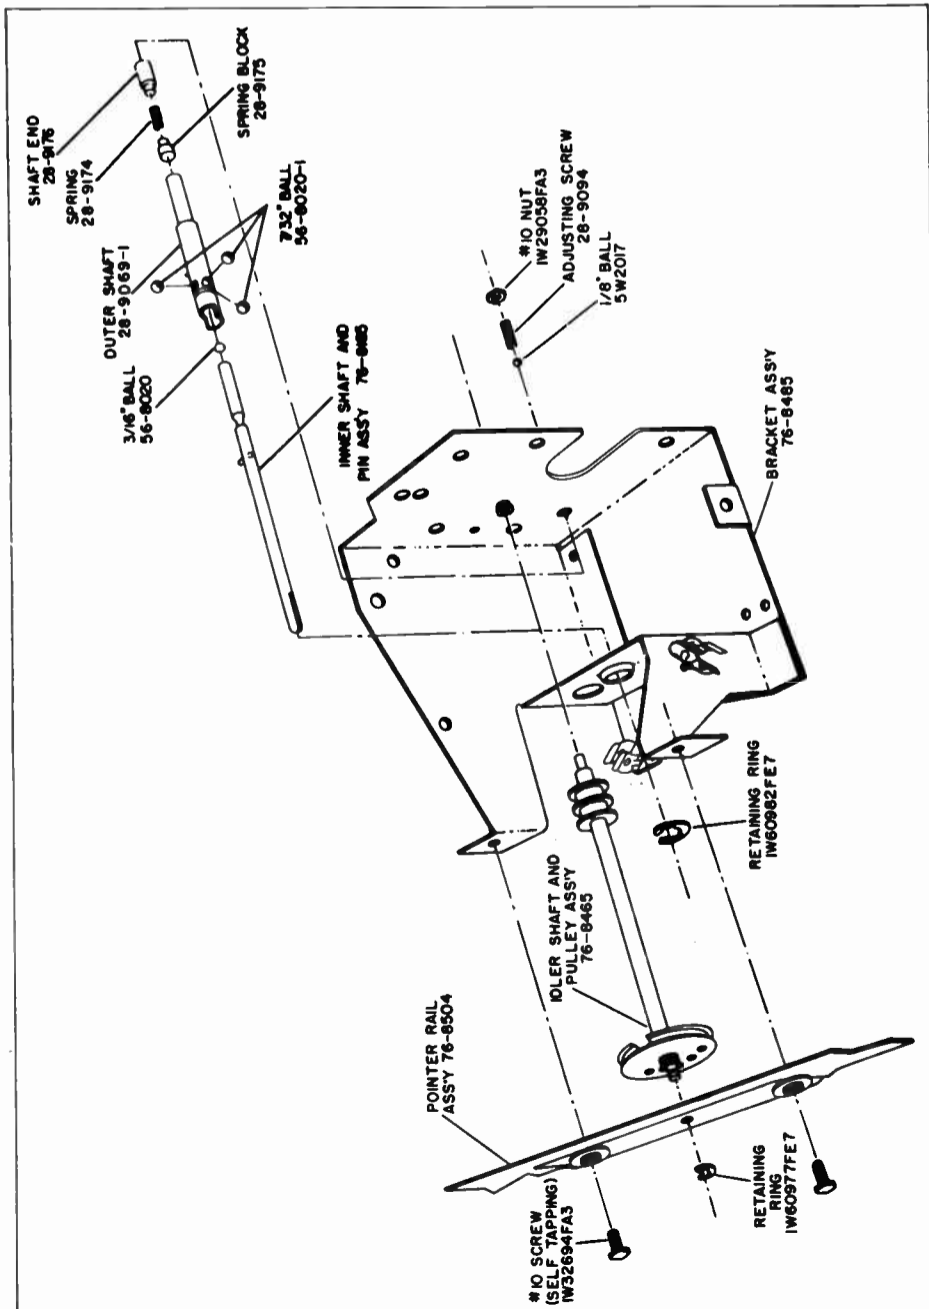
UHF Planetary Drive Assembly, Exploded View, Showing Mechanical Construction TP3-894
